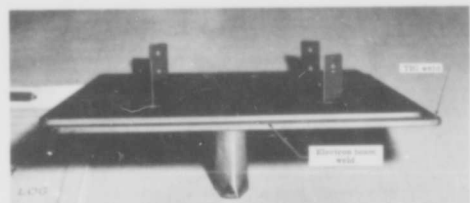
TZM Molybdenum Flat Heat Shield Panel Brazed with B-120 VCA Titanium at 3000° F
